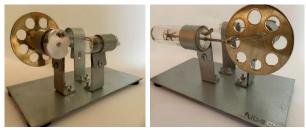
Fixing the cylinders in the racks and connecting the pistons to the engine
